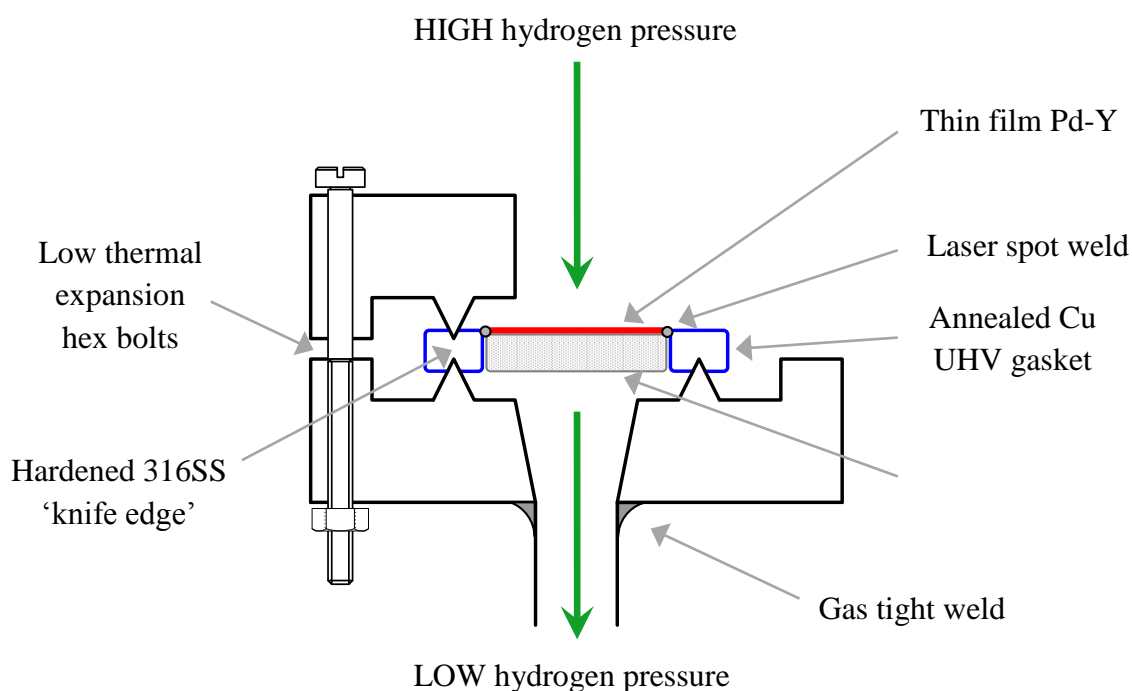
Partial cross section of composite membrane holder and sealing mechanism. (Not to scale)
